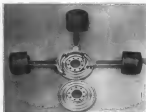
THRUST BLOCK WITH OVER-TYPE CONNECTING ROD AND PISTONS.
